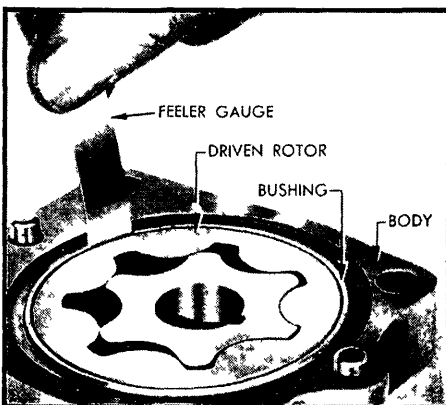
Checking clearance between rotor and bushing of Eaton pump
